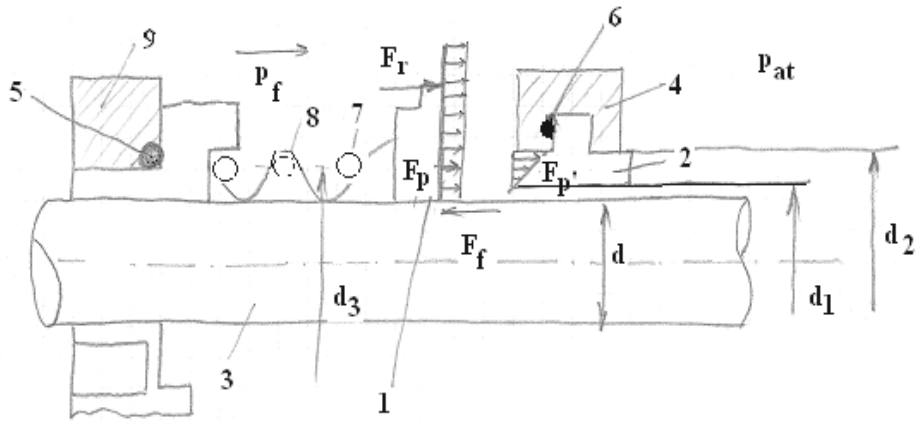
Pressure distribution on the front mechanical seal rings 1- mobile ring, 2- fixed ring in the housing, 3- shaft, 4 - housing, 5, 6 - O-rings, 7 - spring, 8 - rubber bellows [2]
